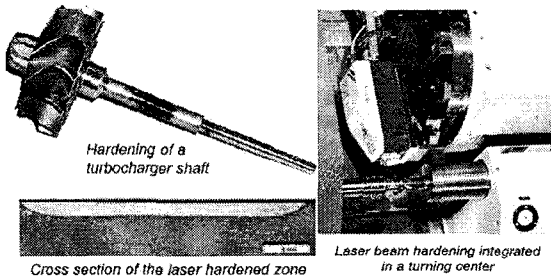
Laser hardening of turbocharger shaft (Fraunhofer USA)
